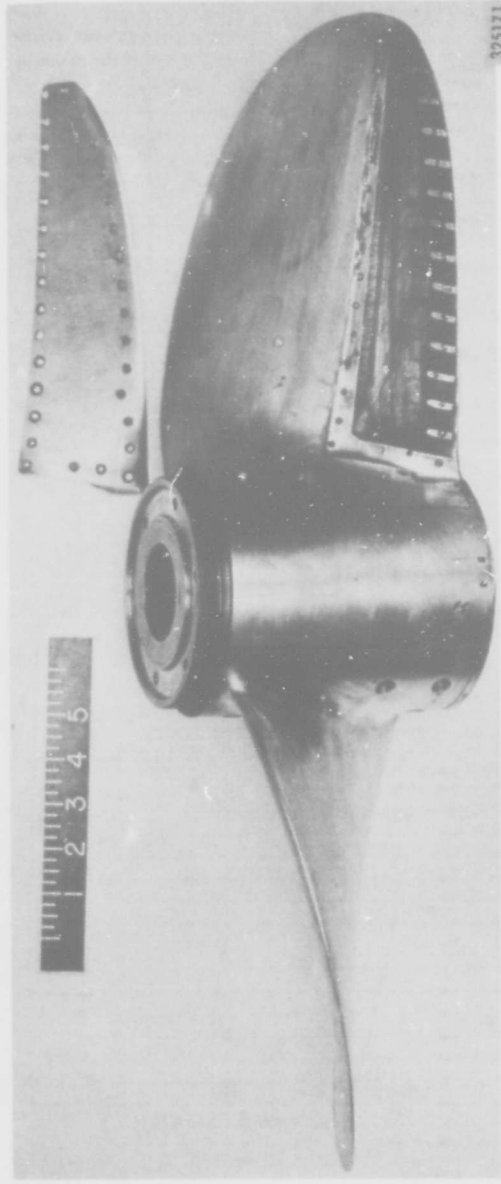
Jet Flap Propeller with Cover Plate Removed
